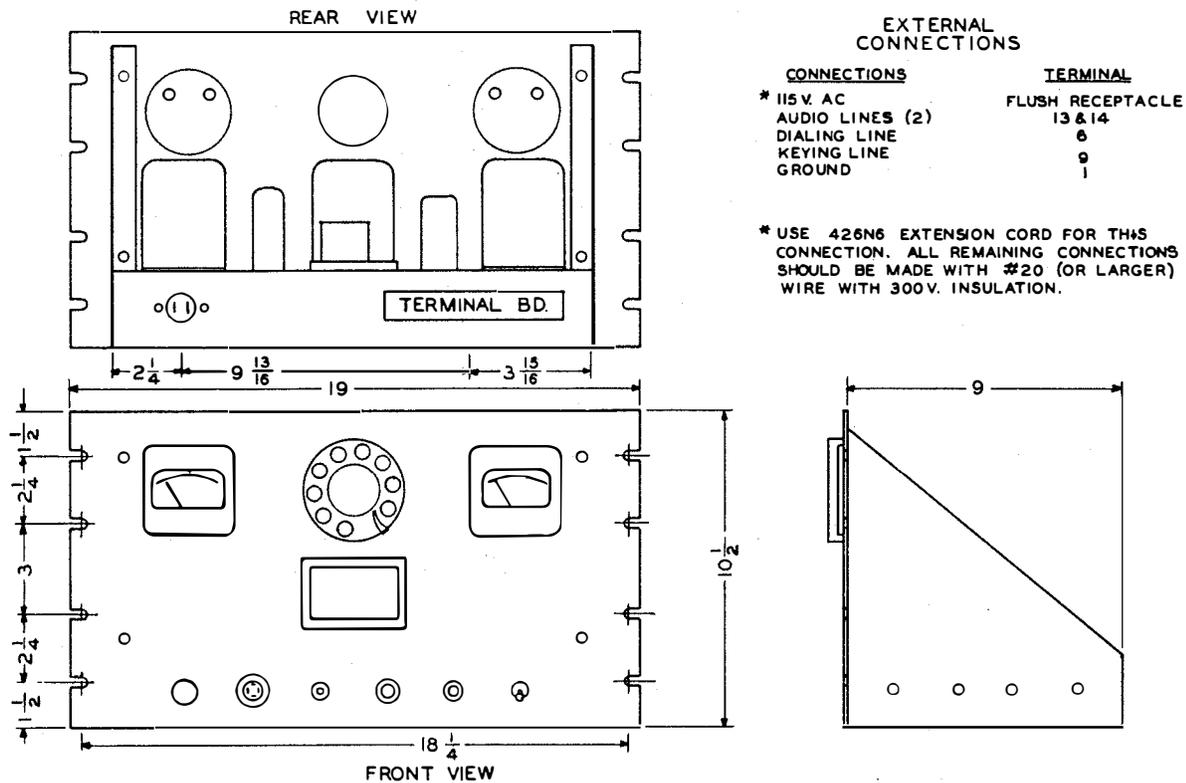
Remote Control Unit Installation (Dwg. No. 2168A)
